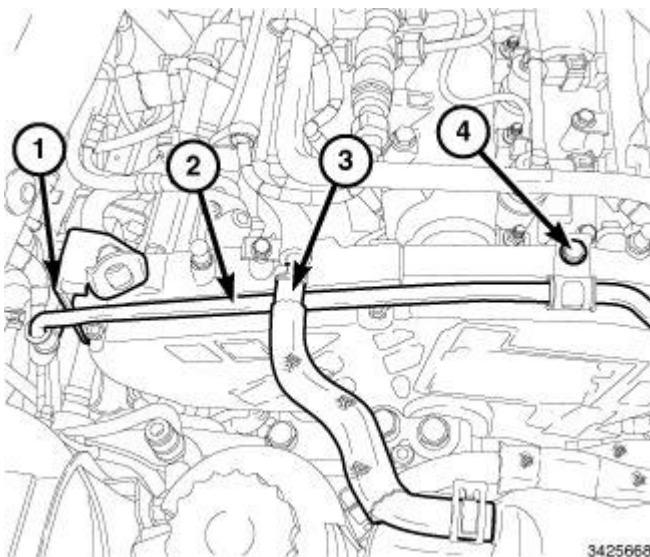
Power Steering Pressure Line, Hose & Fasteners
